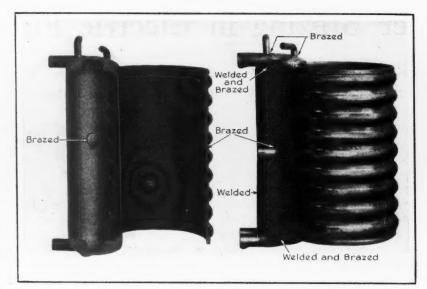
Refrigerator Evaporator Fabricated from Rolled-steel Sheets by Brazing
